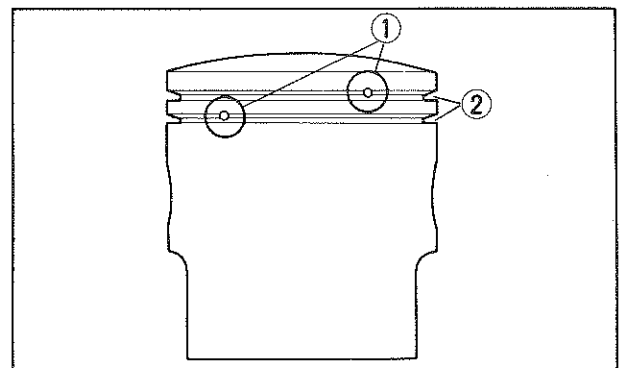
(1) Piston ring dowels (2) Piston ring grooves
